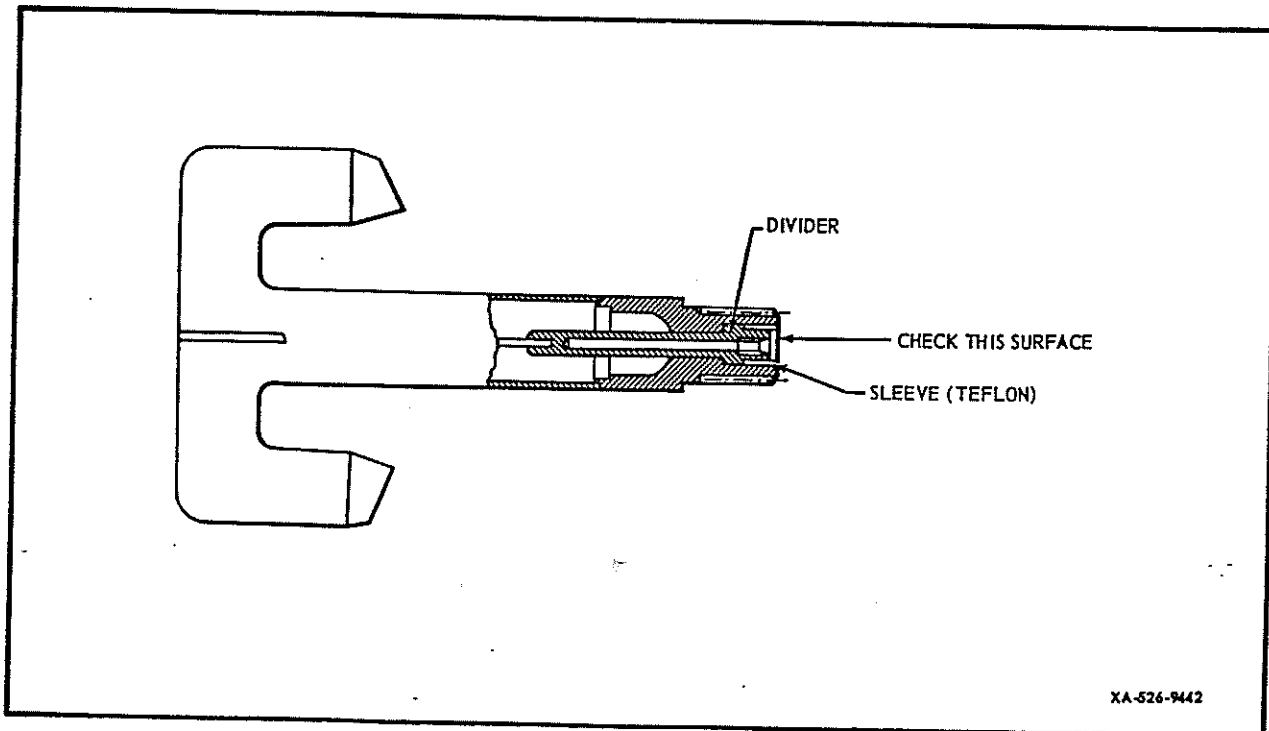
Reworking Fuel Vaporizer Tube Assembly
